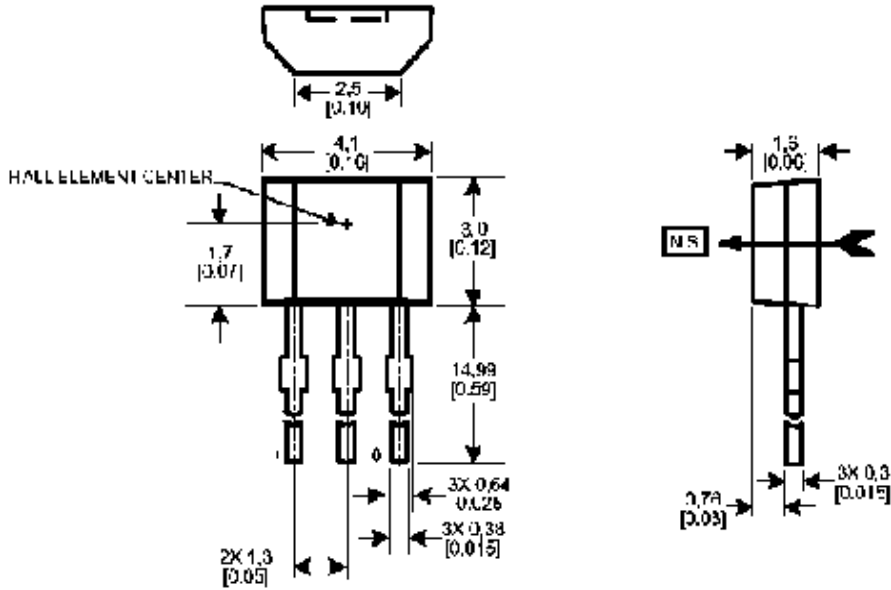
R1 OPTION MOUNTING DIMENSIONS (For reference only. mm/[in])
